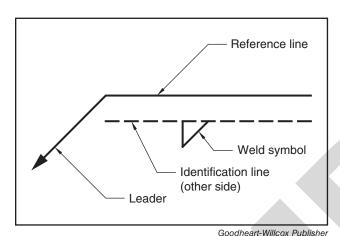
ISO welding symbol. Note the location of the identification line.
